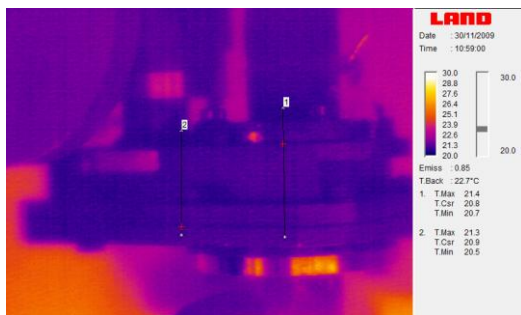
The thermogram of the accelerator flange without defects
